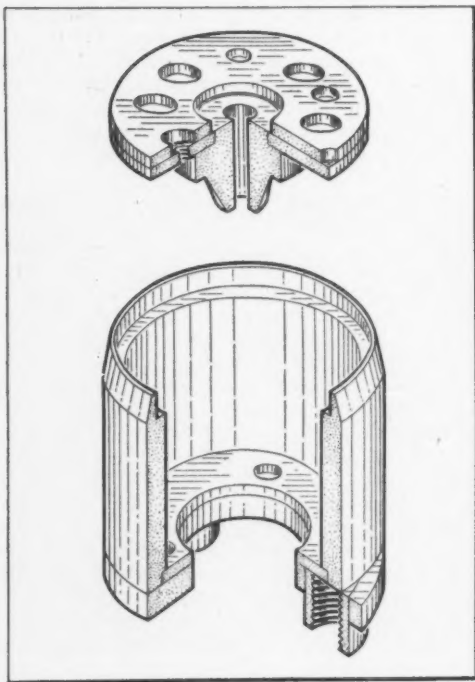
Mild-steel Solenoid Case and End Plate Produced by a Combination of Projection Welding and Copper Brazing
